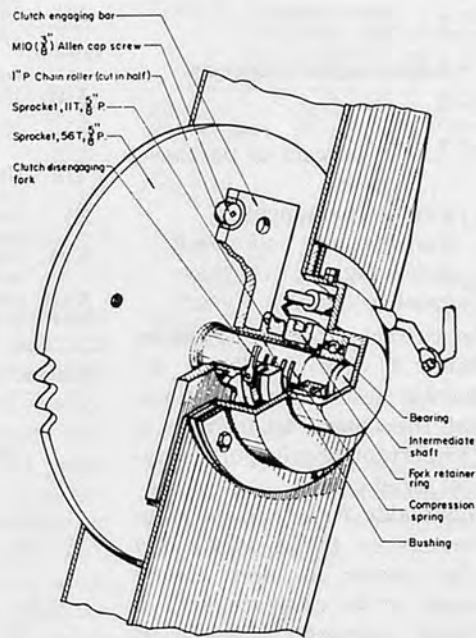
Cut-away view of steering clutches for 6-8 hp Power Tiller
